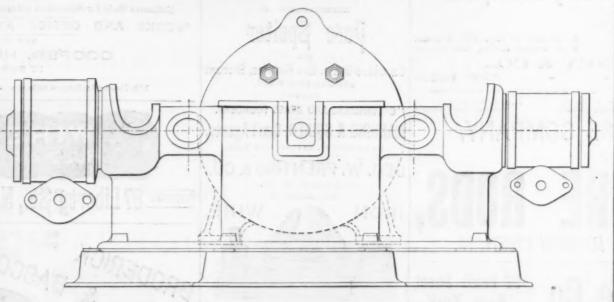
Elevation Showing Arrangement of Cylinders, Frame, &c.
